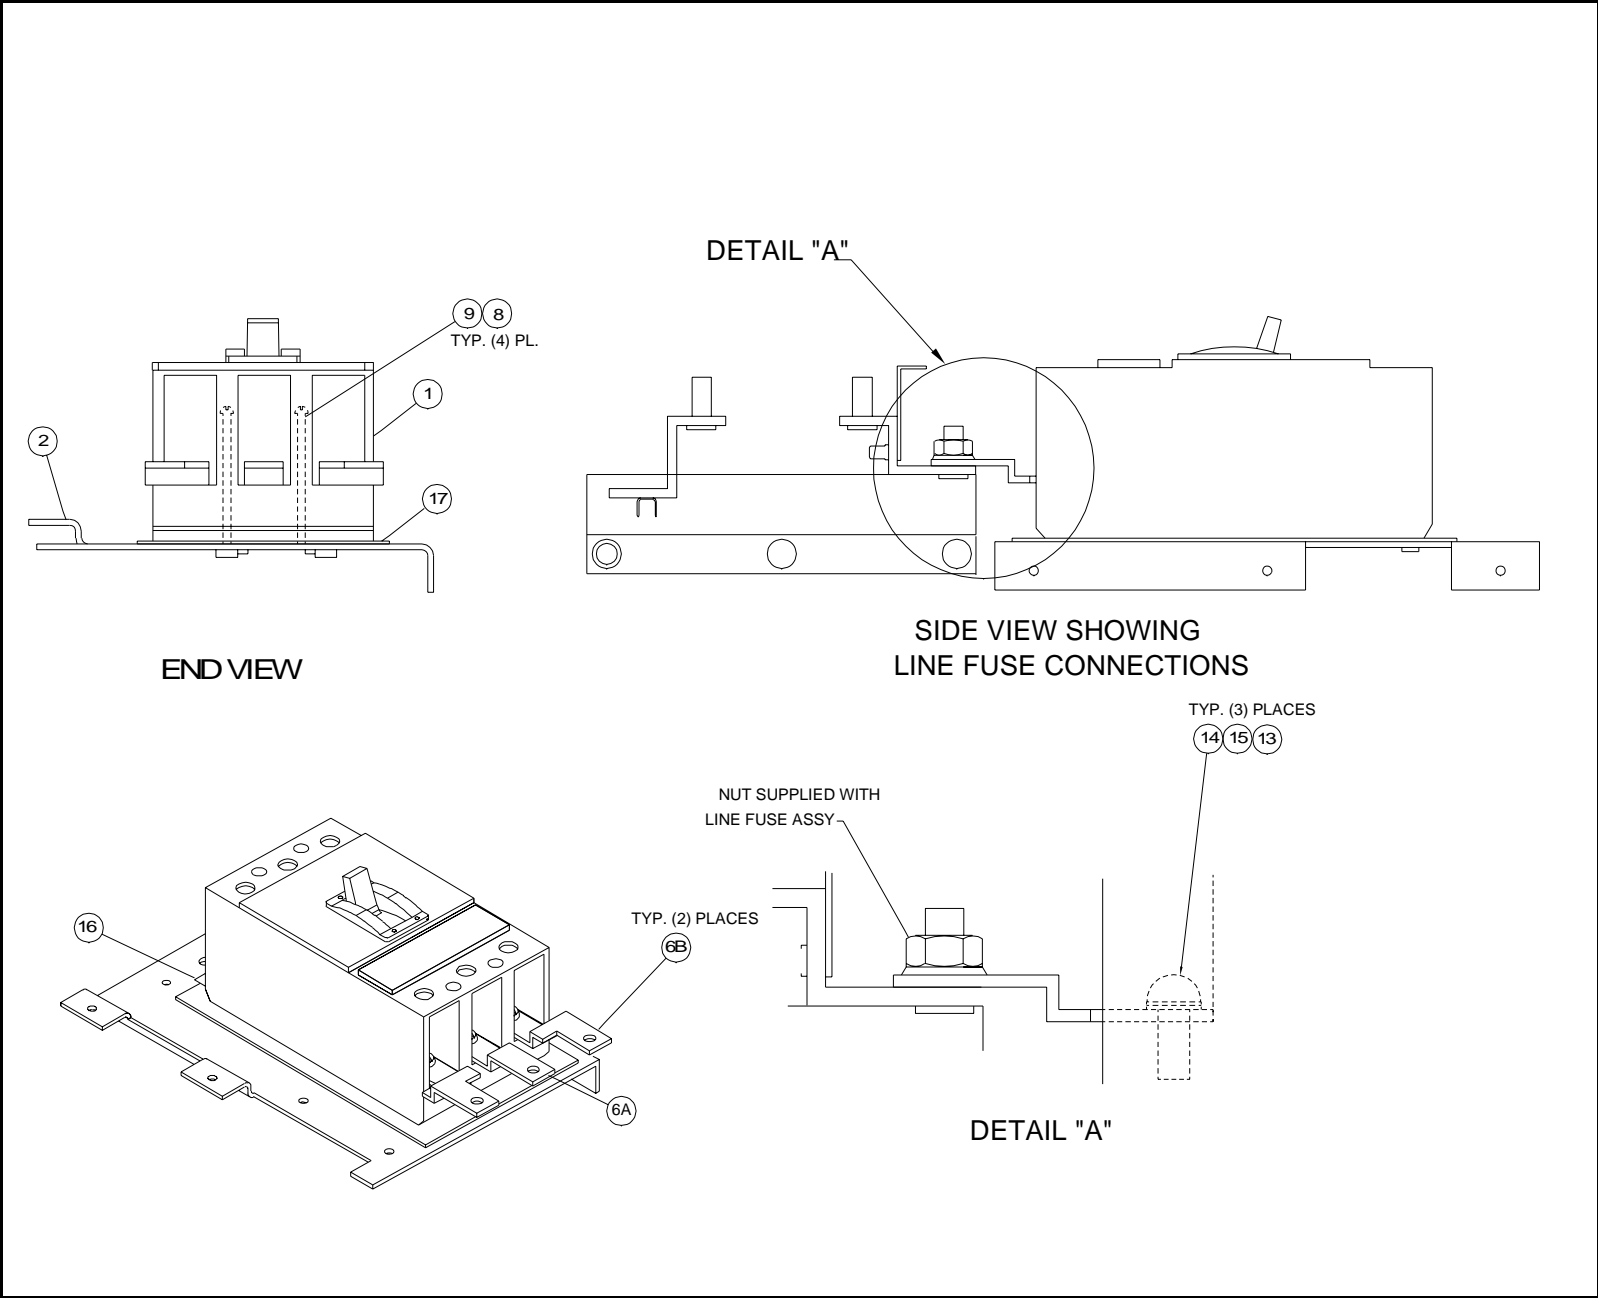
250 Amp Chassis-Mount Kit (M/N 901FK1102)
